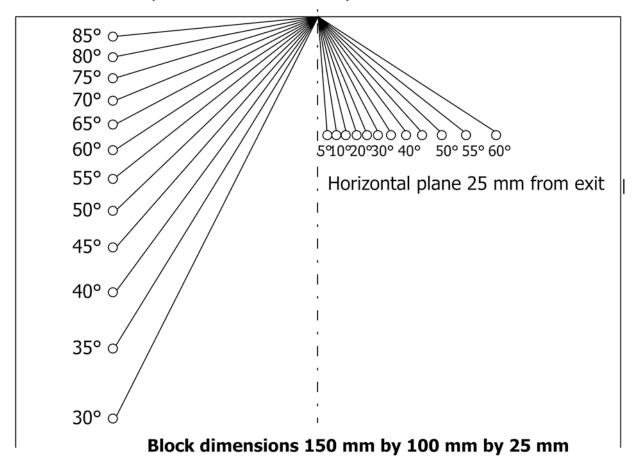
Beam Steering Assessment Block—Single Plane
